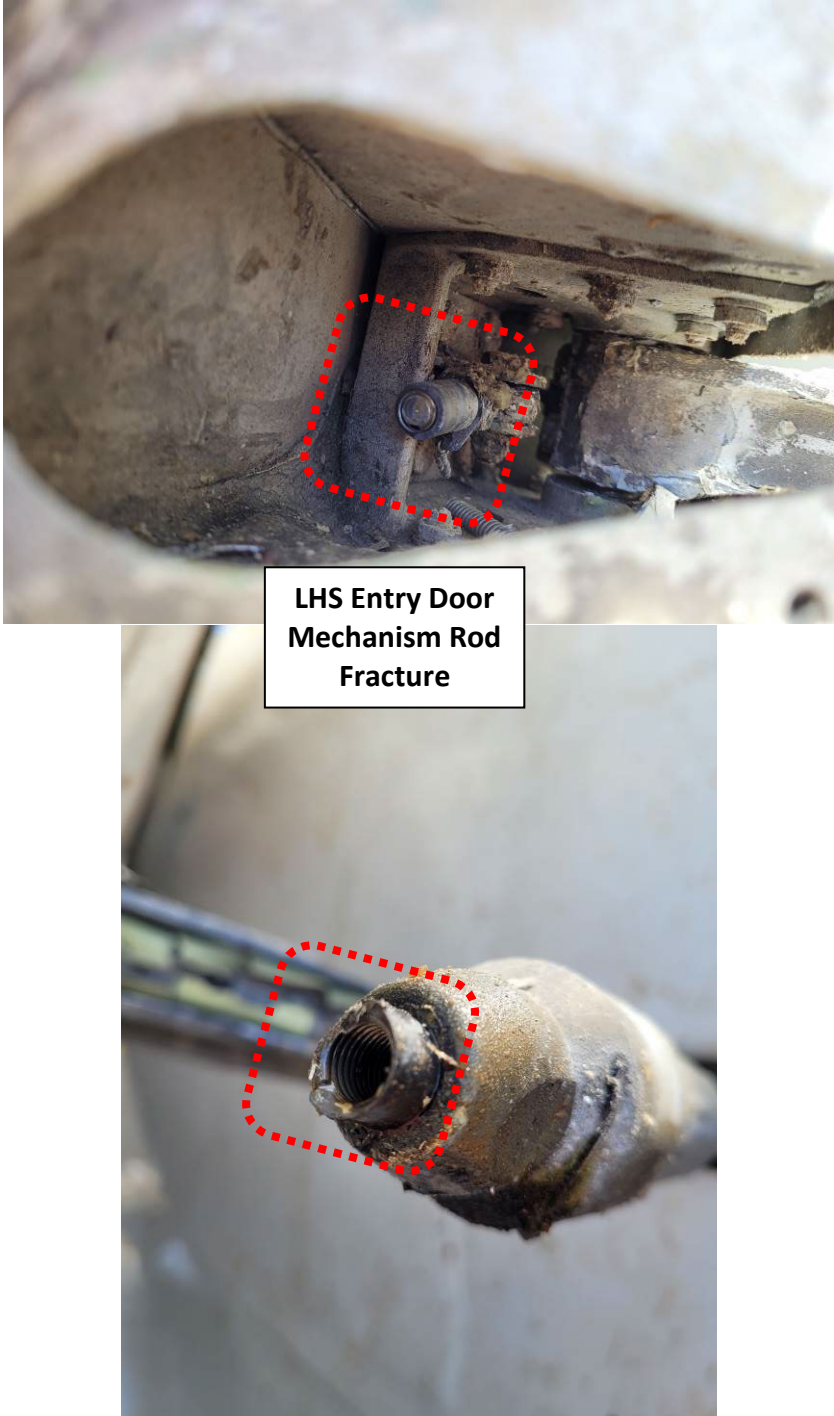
Left Forward Entry Door lower hinge mechanism rod fracture (Boeing photo)
